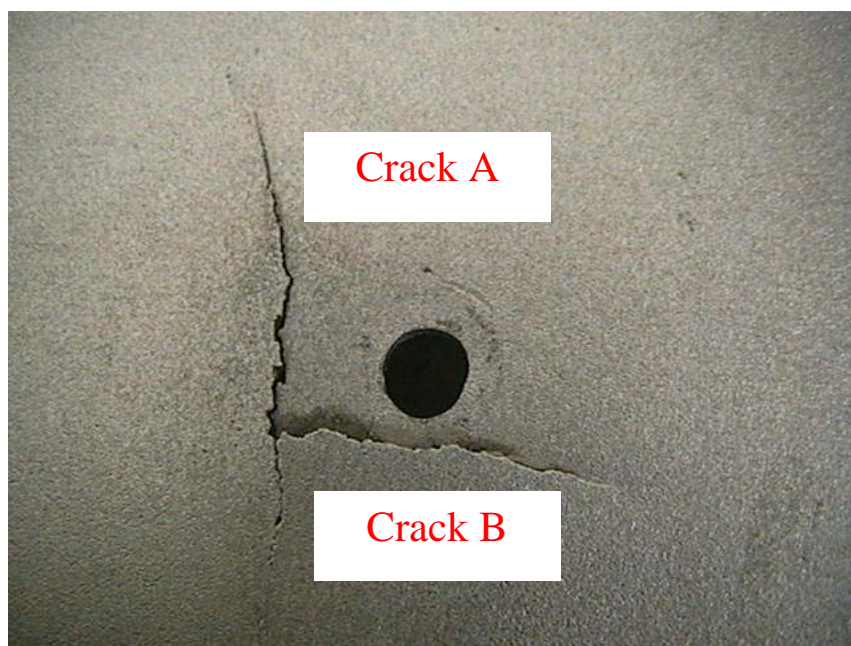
Cracks on the Cessna 402C Left Stub Wing Rib
